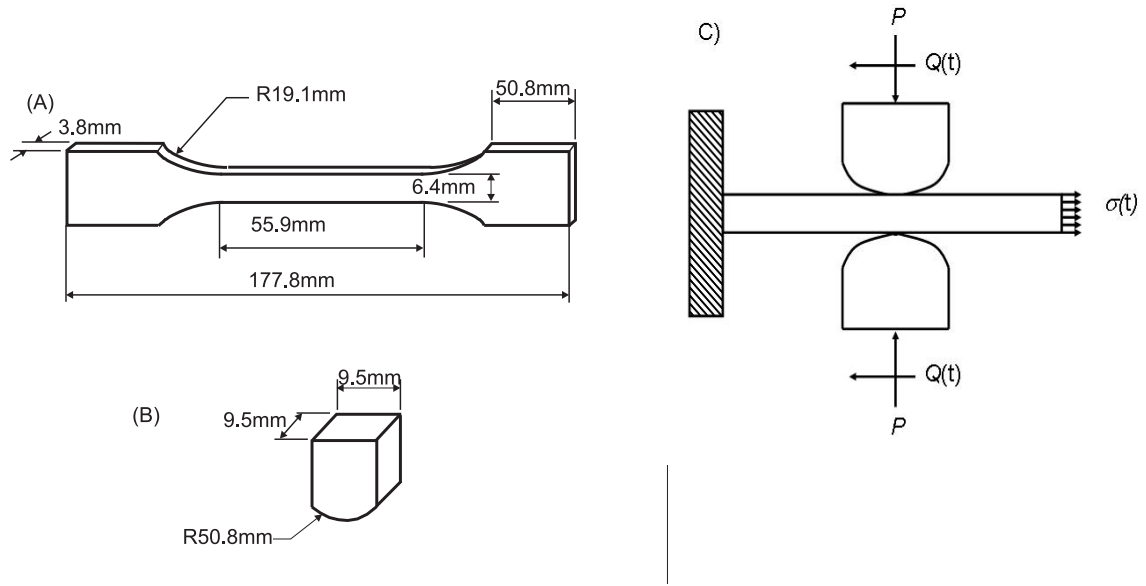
Schematic of (a) the fretting fatigue specimen, (b) fretting pad and (c) fretting fatigue test setup. After Jin & Mall (2004)
